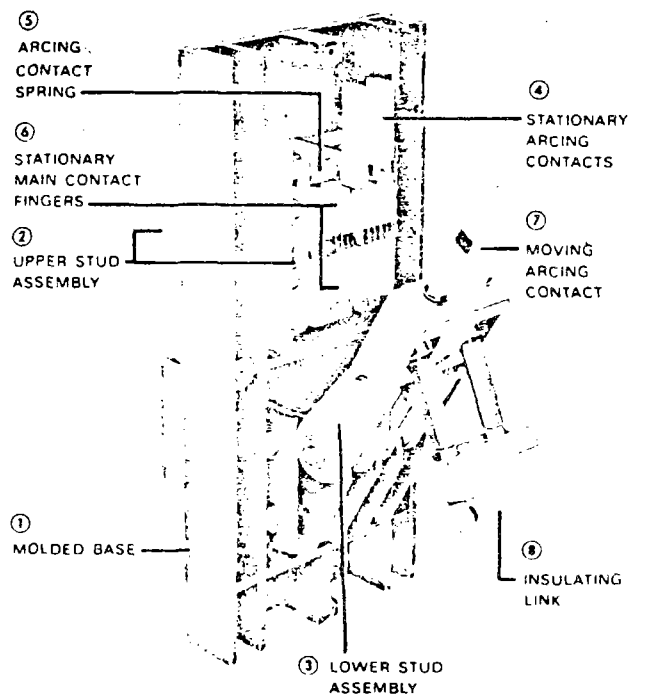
Type DS-840 Pole Unit Assembly - Front View
